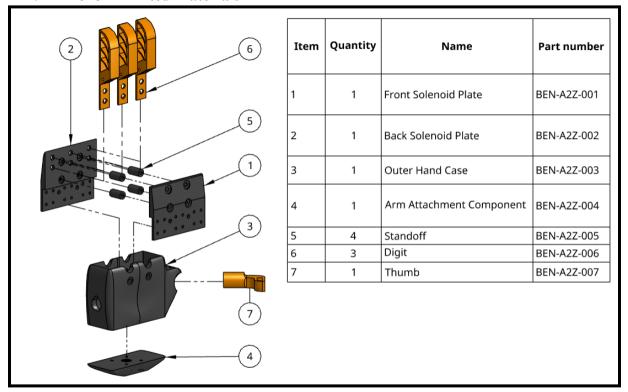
3D printed components exploded view and bill of materials. Part numbers correspond to part numbers within Table A-2: 3D Printed Parts List.
